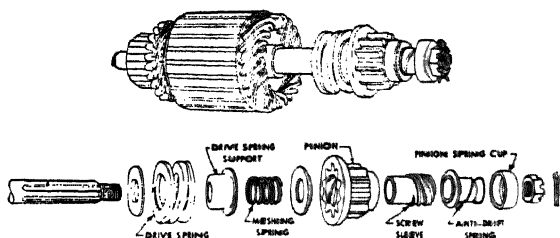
SPECIAL OUTBOARD-TYPE BENDIX DRIVE
